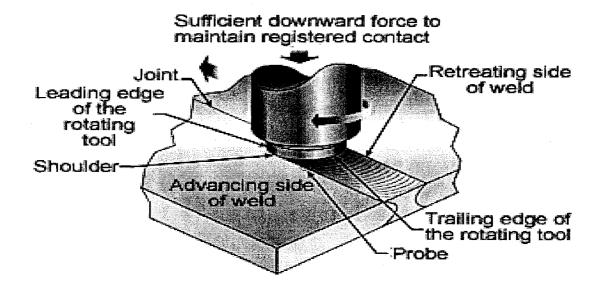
Schematic of the friction stir welding process (Source: http://www.mts.com/aesd/friction_stir.htm)
